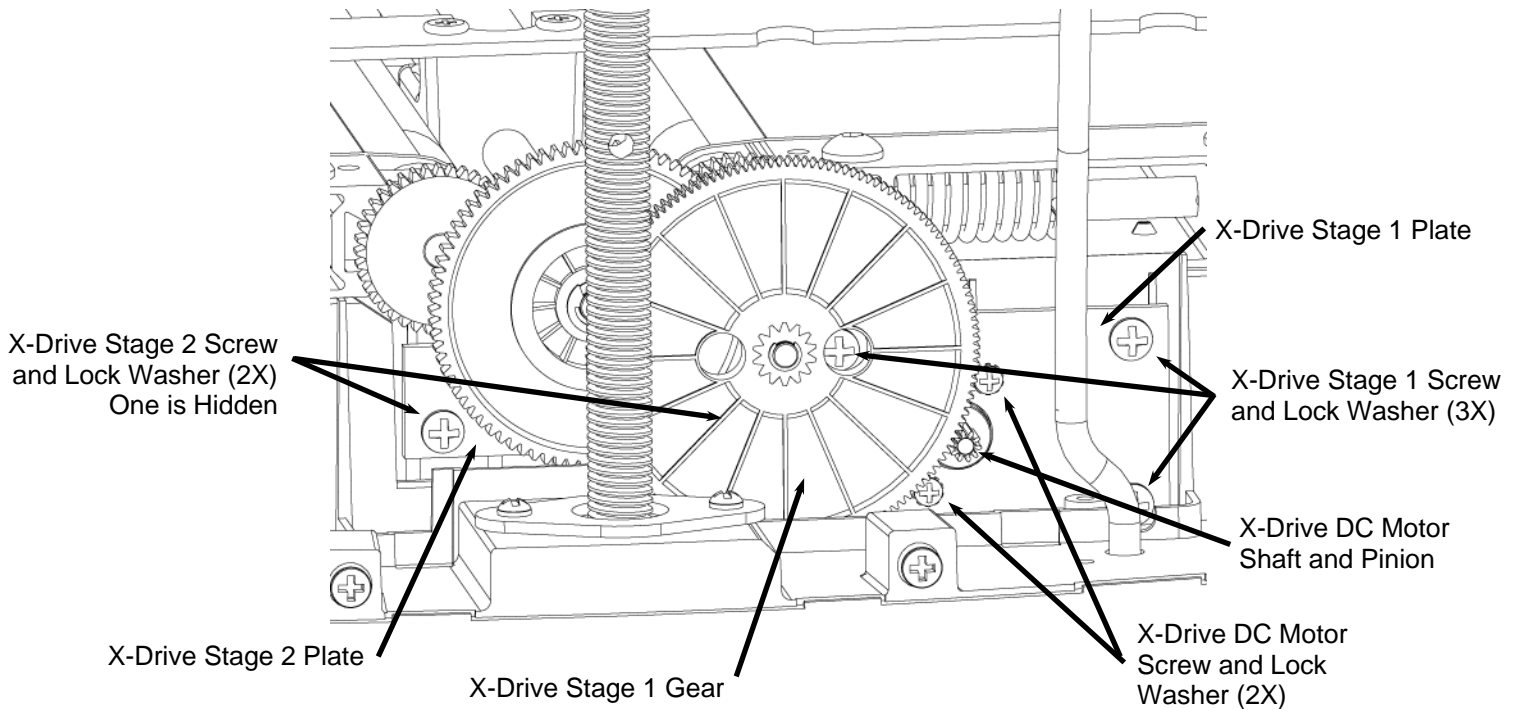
VIEW OF THE X-DRIVE GEAR TRAIN
